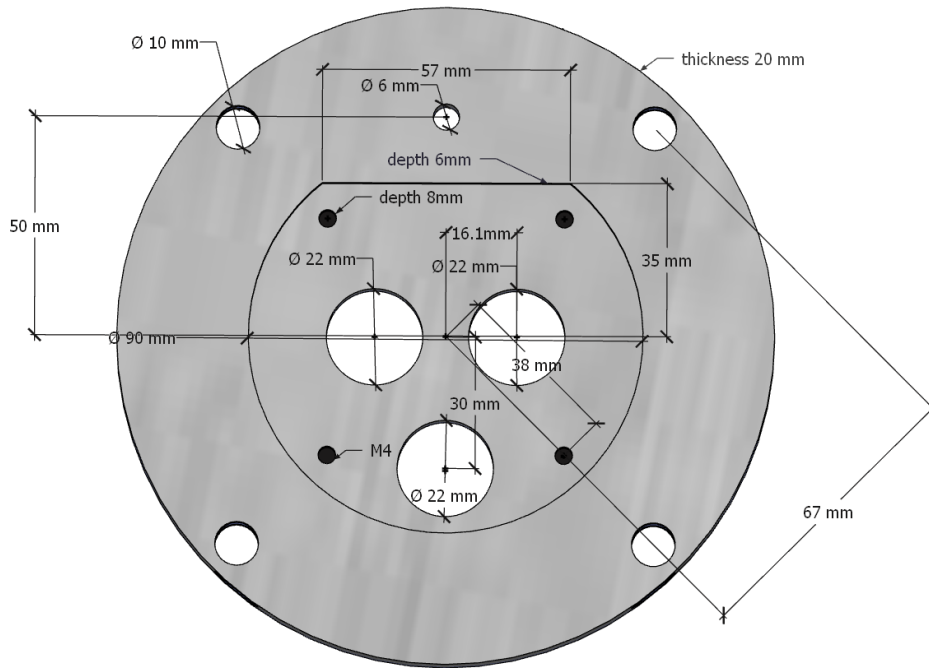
Top view of the stainless steel block placed over the glass tube
